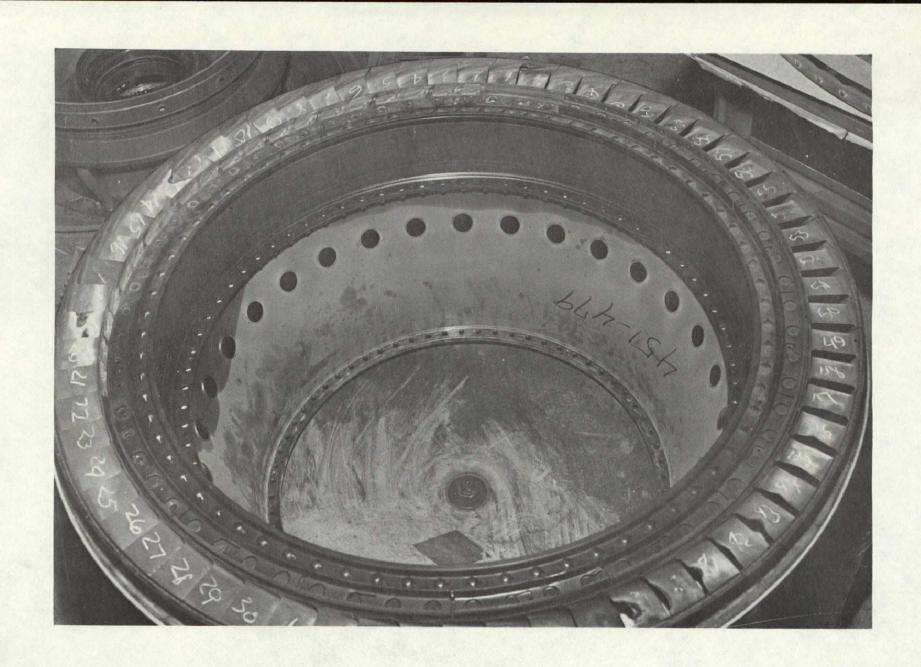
Stage 1 HP Turbine Nozzle Assembly, Aft End, Overall View.
